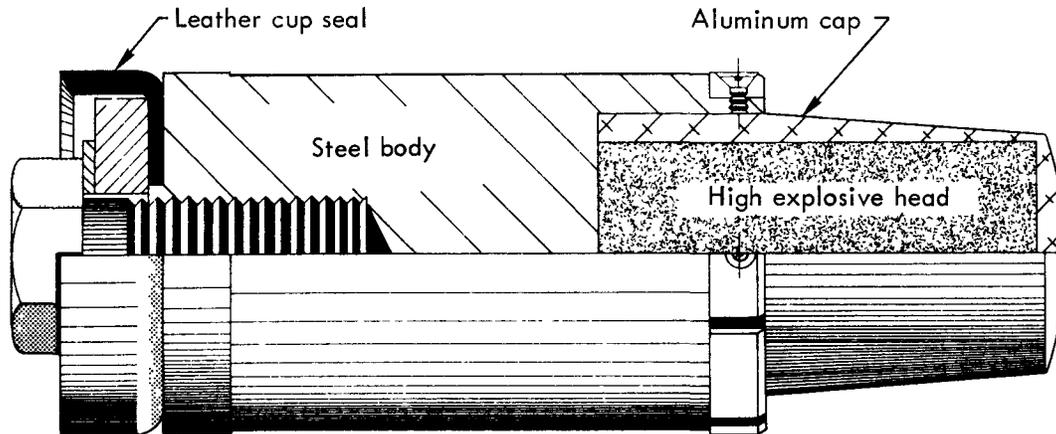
The Susan projectile. Scaled drawing; the high explosive head is 4 in. long by 2 in. in diameter (0.102 m \times 0.051 m).
